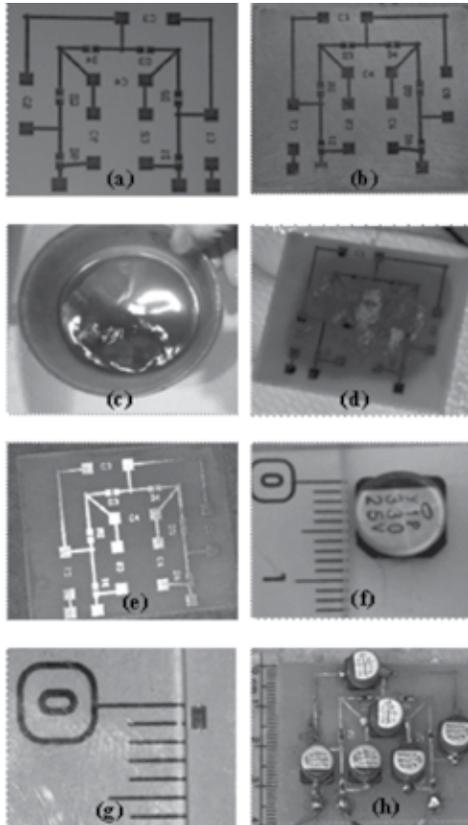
Fabrication of ultra low voltage CWC: (a) Circuit printed on photographic paper, (b) Circuit pattern transfer on a copper clad sheet, (c) FeCl₃ etching Solution, (d) partially etched board, (e) completely etched PCB, (f) Aluminum capacitor, (g) Ultra-Low Voltage diode, (h) developed converter circuit
